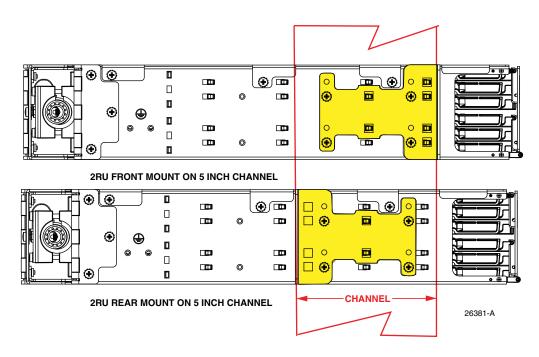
2RU Mounting Bracket Positions (Front and Rear on 5-Inch Channel)
